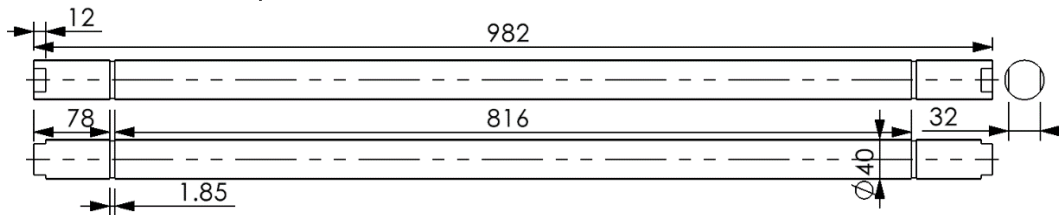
2D drawing of existing central roller shaft-LKAB[14]
